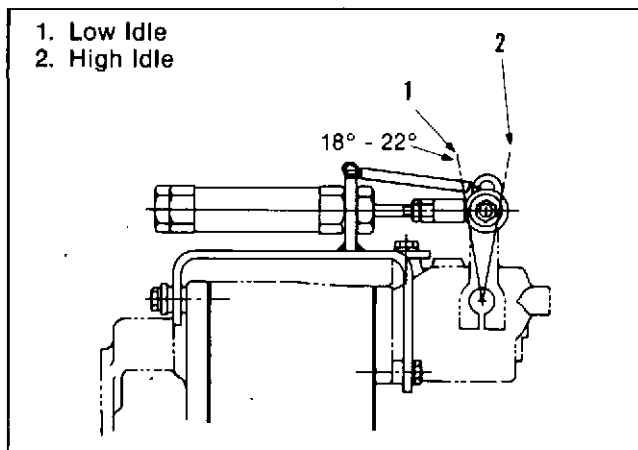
, (F5373). Air cylinder kit, Part No. 3017333, on a VS fuel pump.
